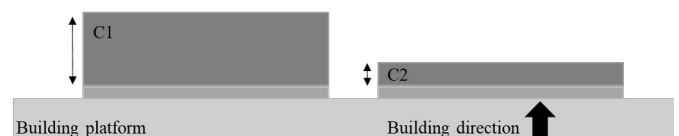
Schematic of test samples C1 and C2 on the building platform.
